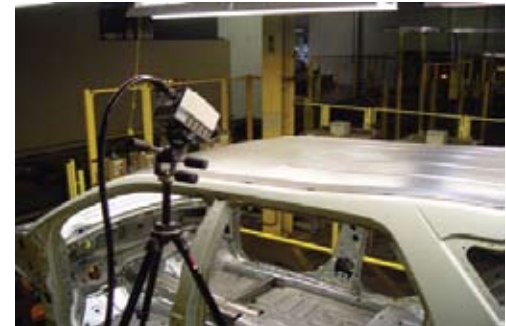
Set-up of an infrared imaging system for laser weld inspection at the Ford assembly line.
